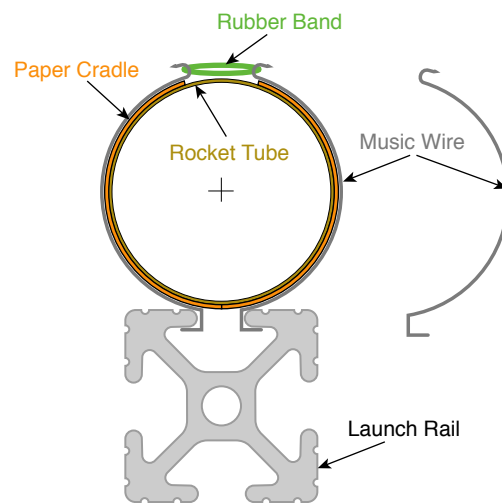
Full-size drawing of the cross-section of the first prototype fly-away rail guide, and how it mates to a launch rail.
